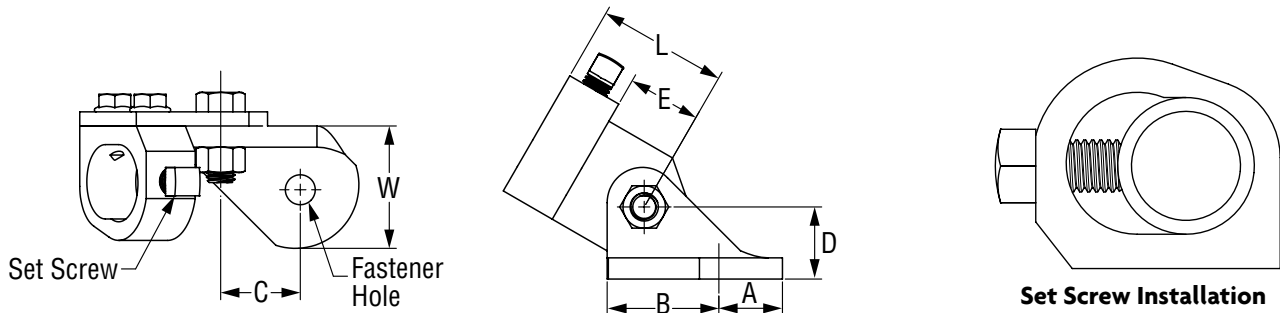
DIMENSIONS (IN) • WEIGHT (LBS)
